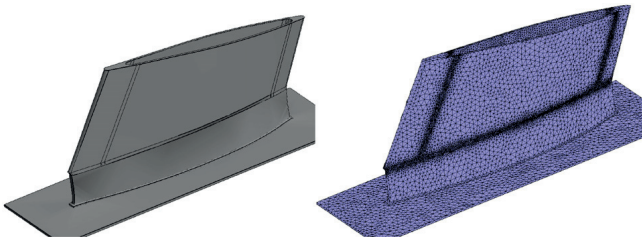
Reconstructed geometry (left) and mesh of the assembly (right).
